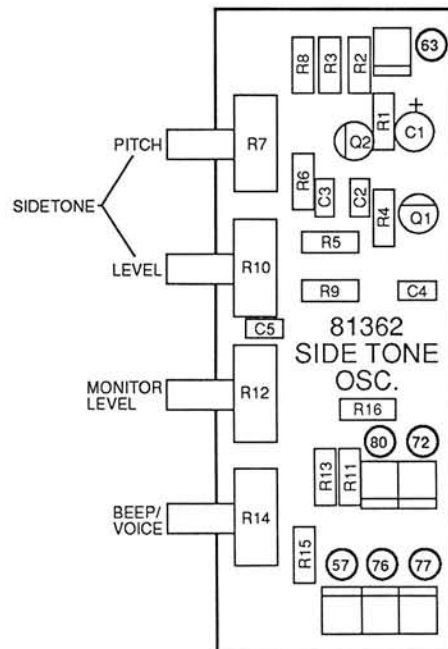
81362 SIDETONE BOARD COMPONENT LAYOUT
